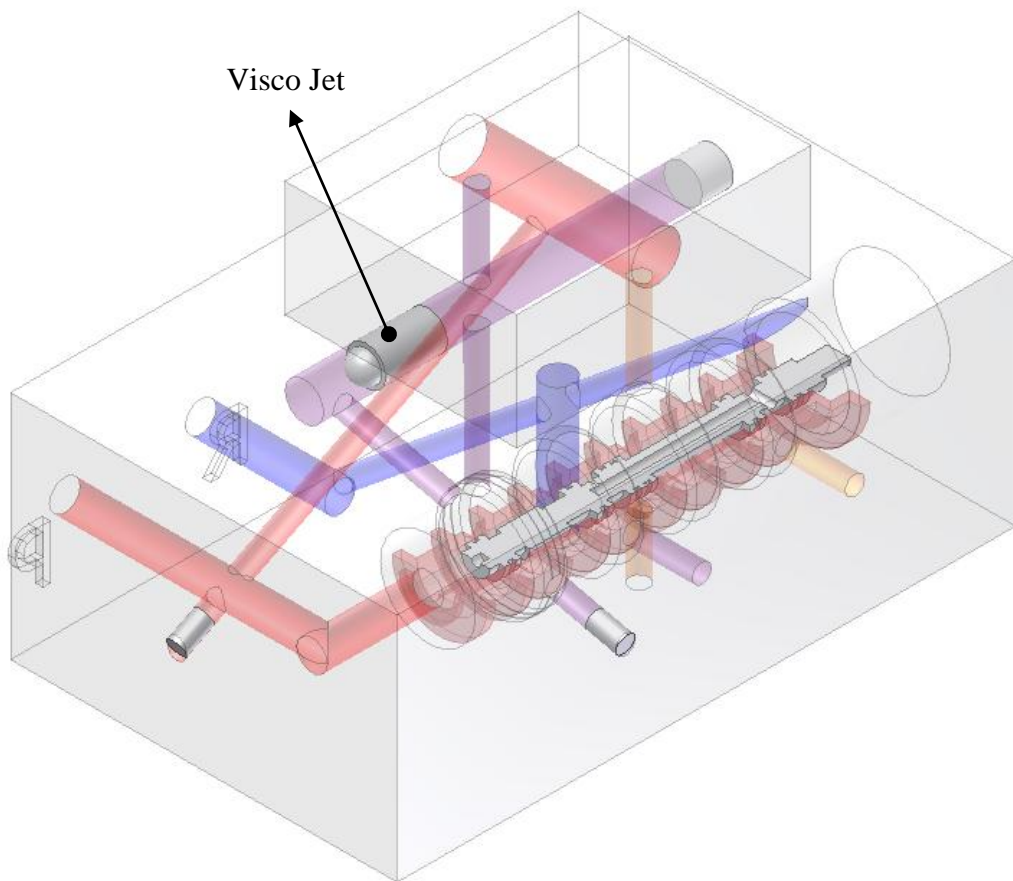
3-D solid model of hydraulic lines and spool assembly
